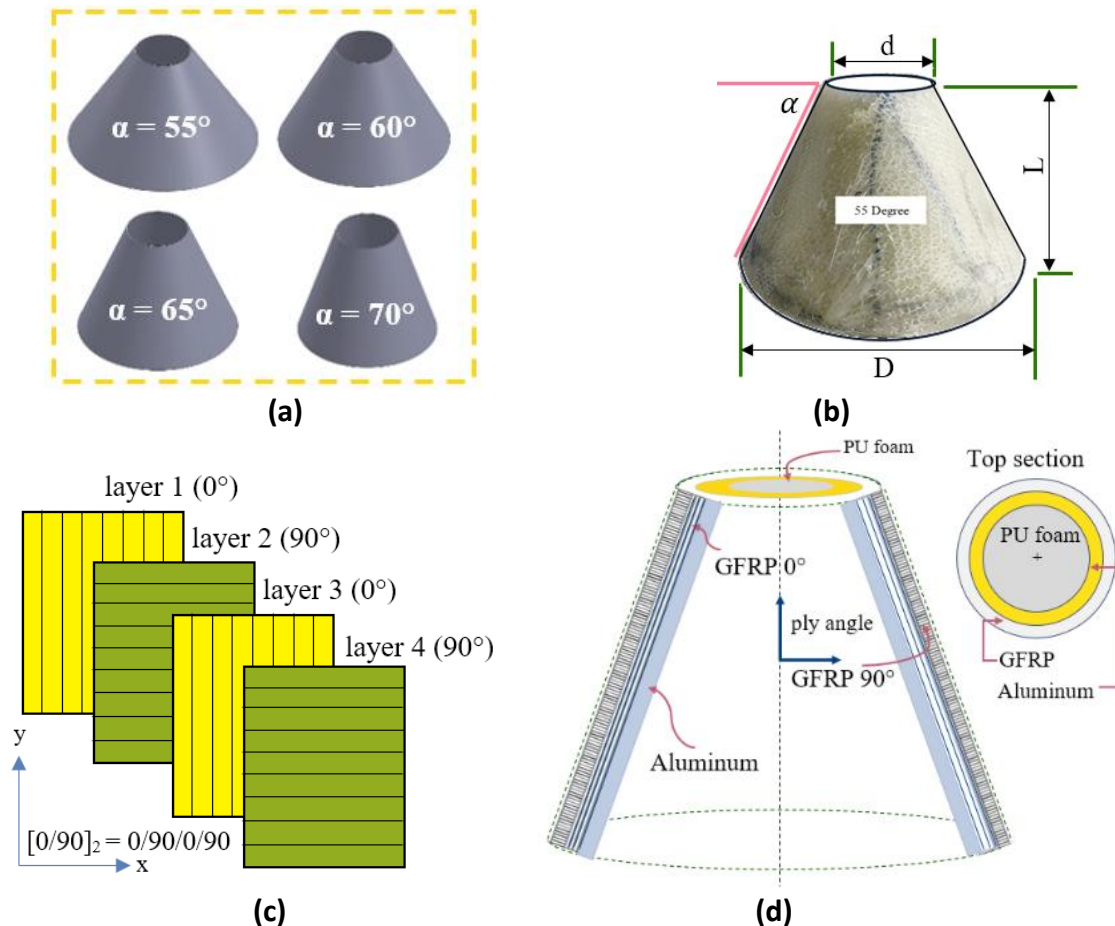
Details of the test specimen fabrication: (a) specimen cone angle, (b) specimen dimensions, (c) glass fiber lay-up configuration, and (d) material stacking sequence.
